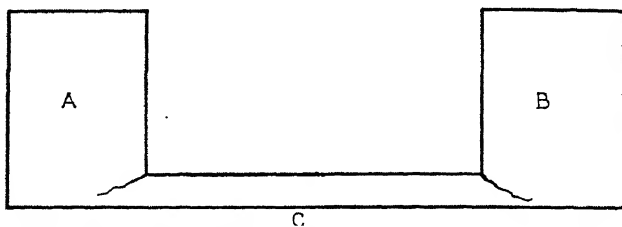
Improper casting design. Note abrupt change of section and sharp angles.
